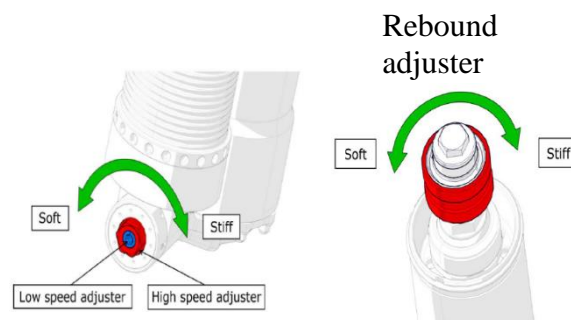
Damper setting (Skoda\_Motorsport 2023b)
